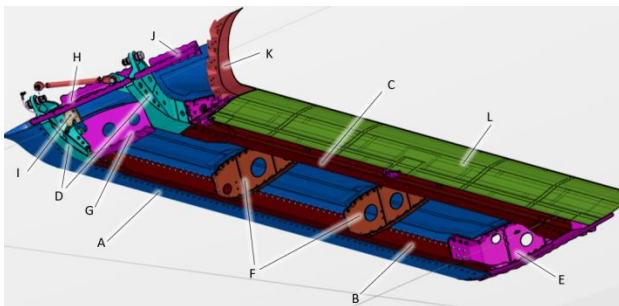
Lower wing arrangement with lower panels and fairings removed: (A) Upper cover, (B) Forward Spar, (C) Aft Spar, (D) “Hockey sticks”, (E) Inboard Rib, (F) Mid ribs, (G) Kink Rib, (H) Outboard rib, (I) Flexball bracket, (J) OFW rib, (K) TEM, (L) Lower flap.
